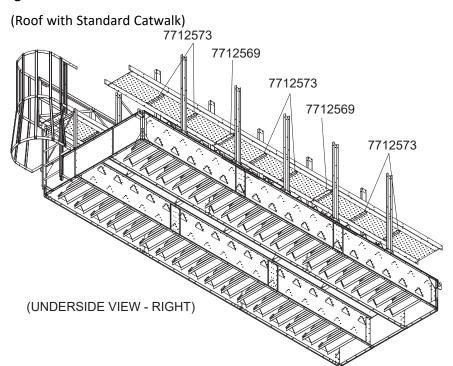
Attach the Stiffeners (For Roof with Standard Catwalk)
